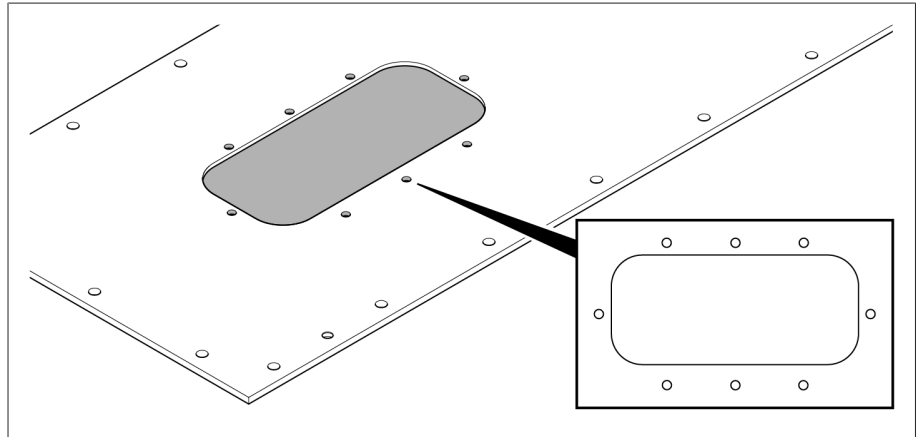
View of the exterior surface of the transformer with opening for sealing module
